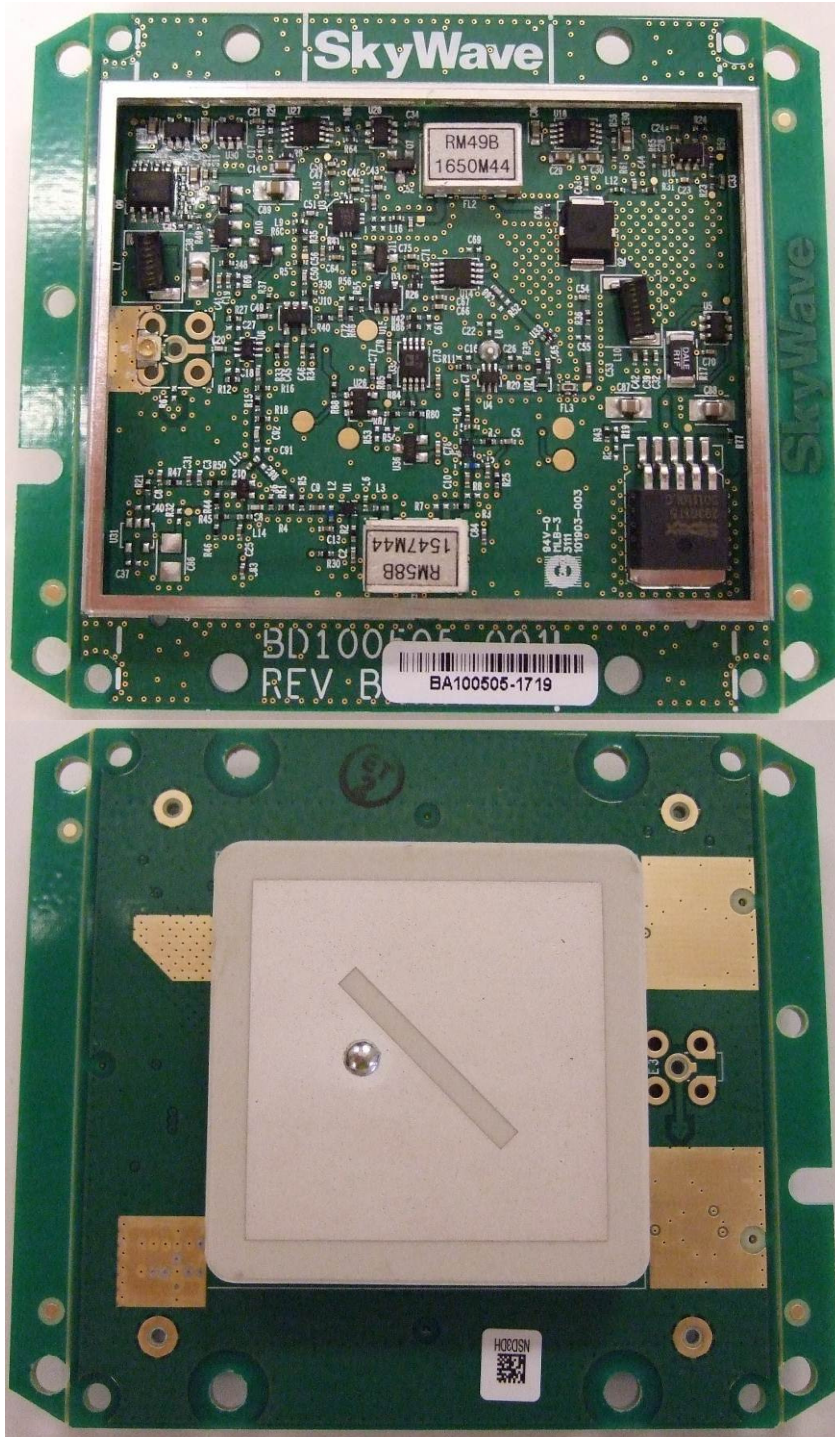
IDP-680 Antenna Card – Top and Bottom View
